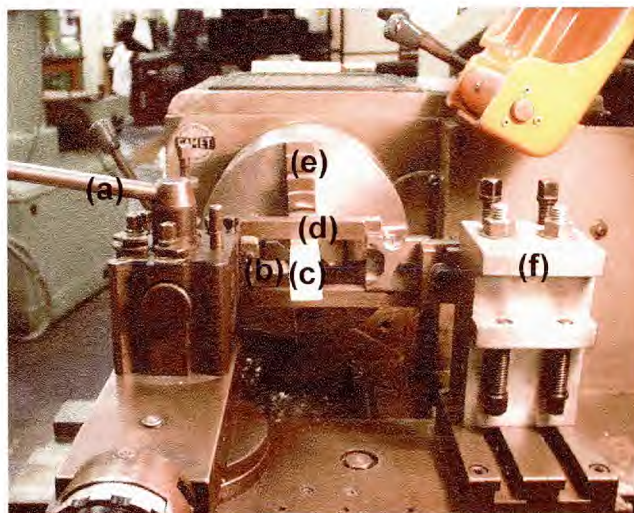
Lathe set-up for notching. (a) Tool post, (b) cutting tool, (c) specimen, (d) notching jig, (e) self-center 4 jaws chuck and (f) notch jig post.
